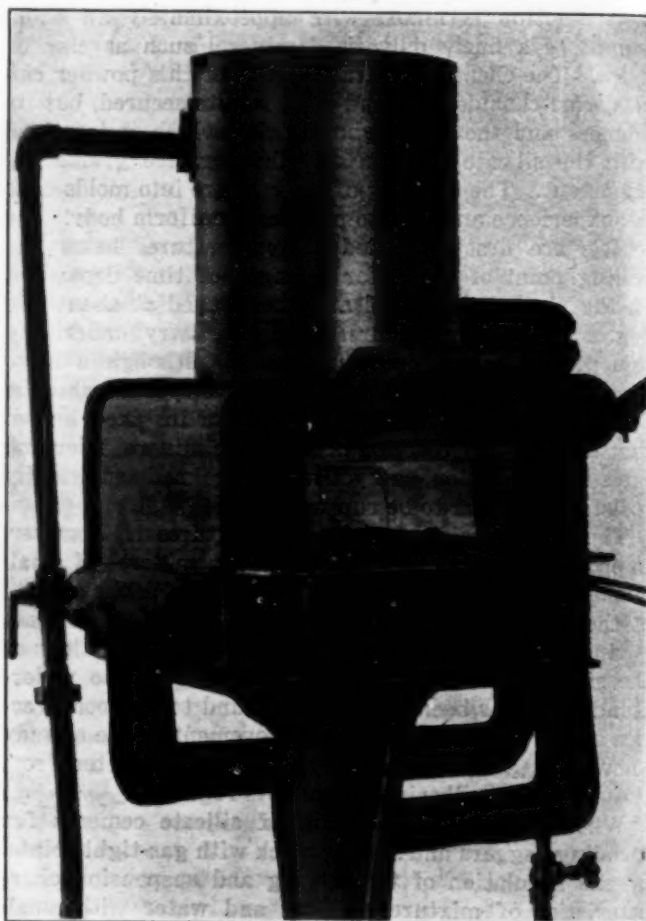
AUTHOR'S FIRST RECUPERATOR, MOUNTED ON TOOL-ROOM FURNACE
